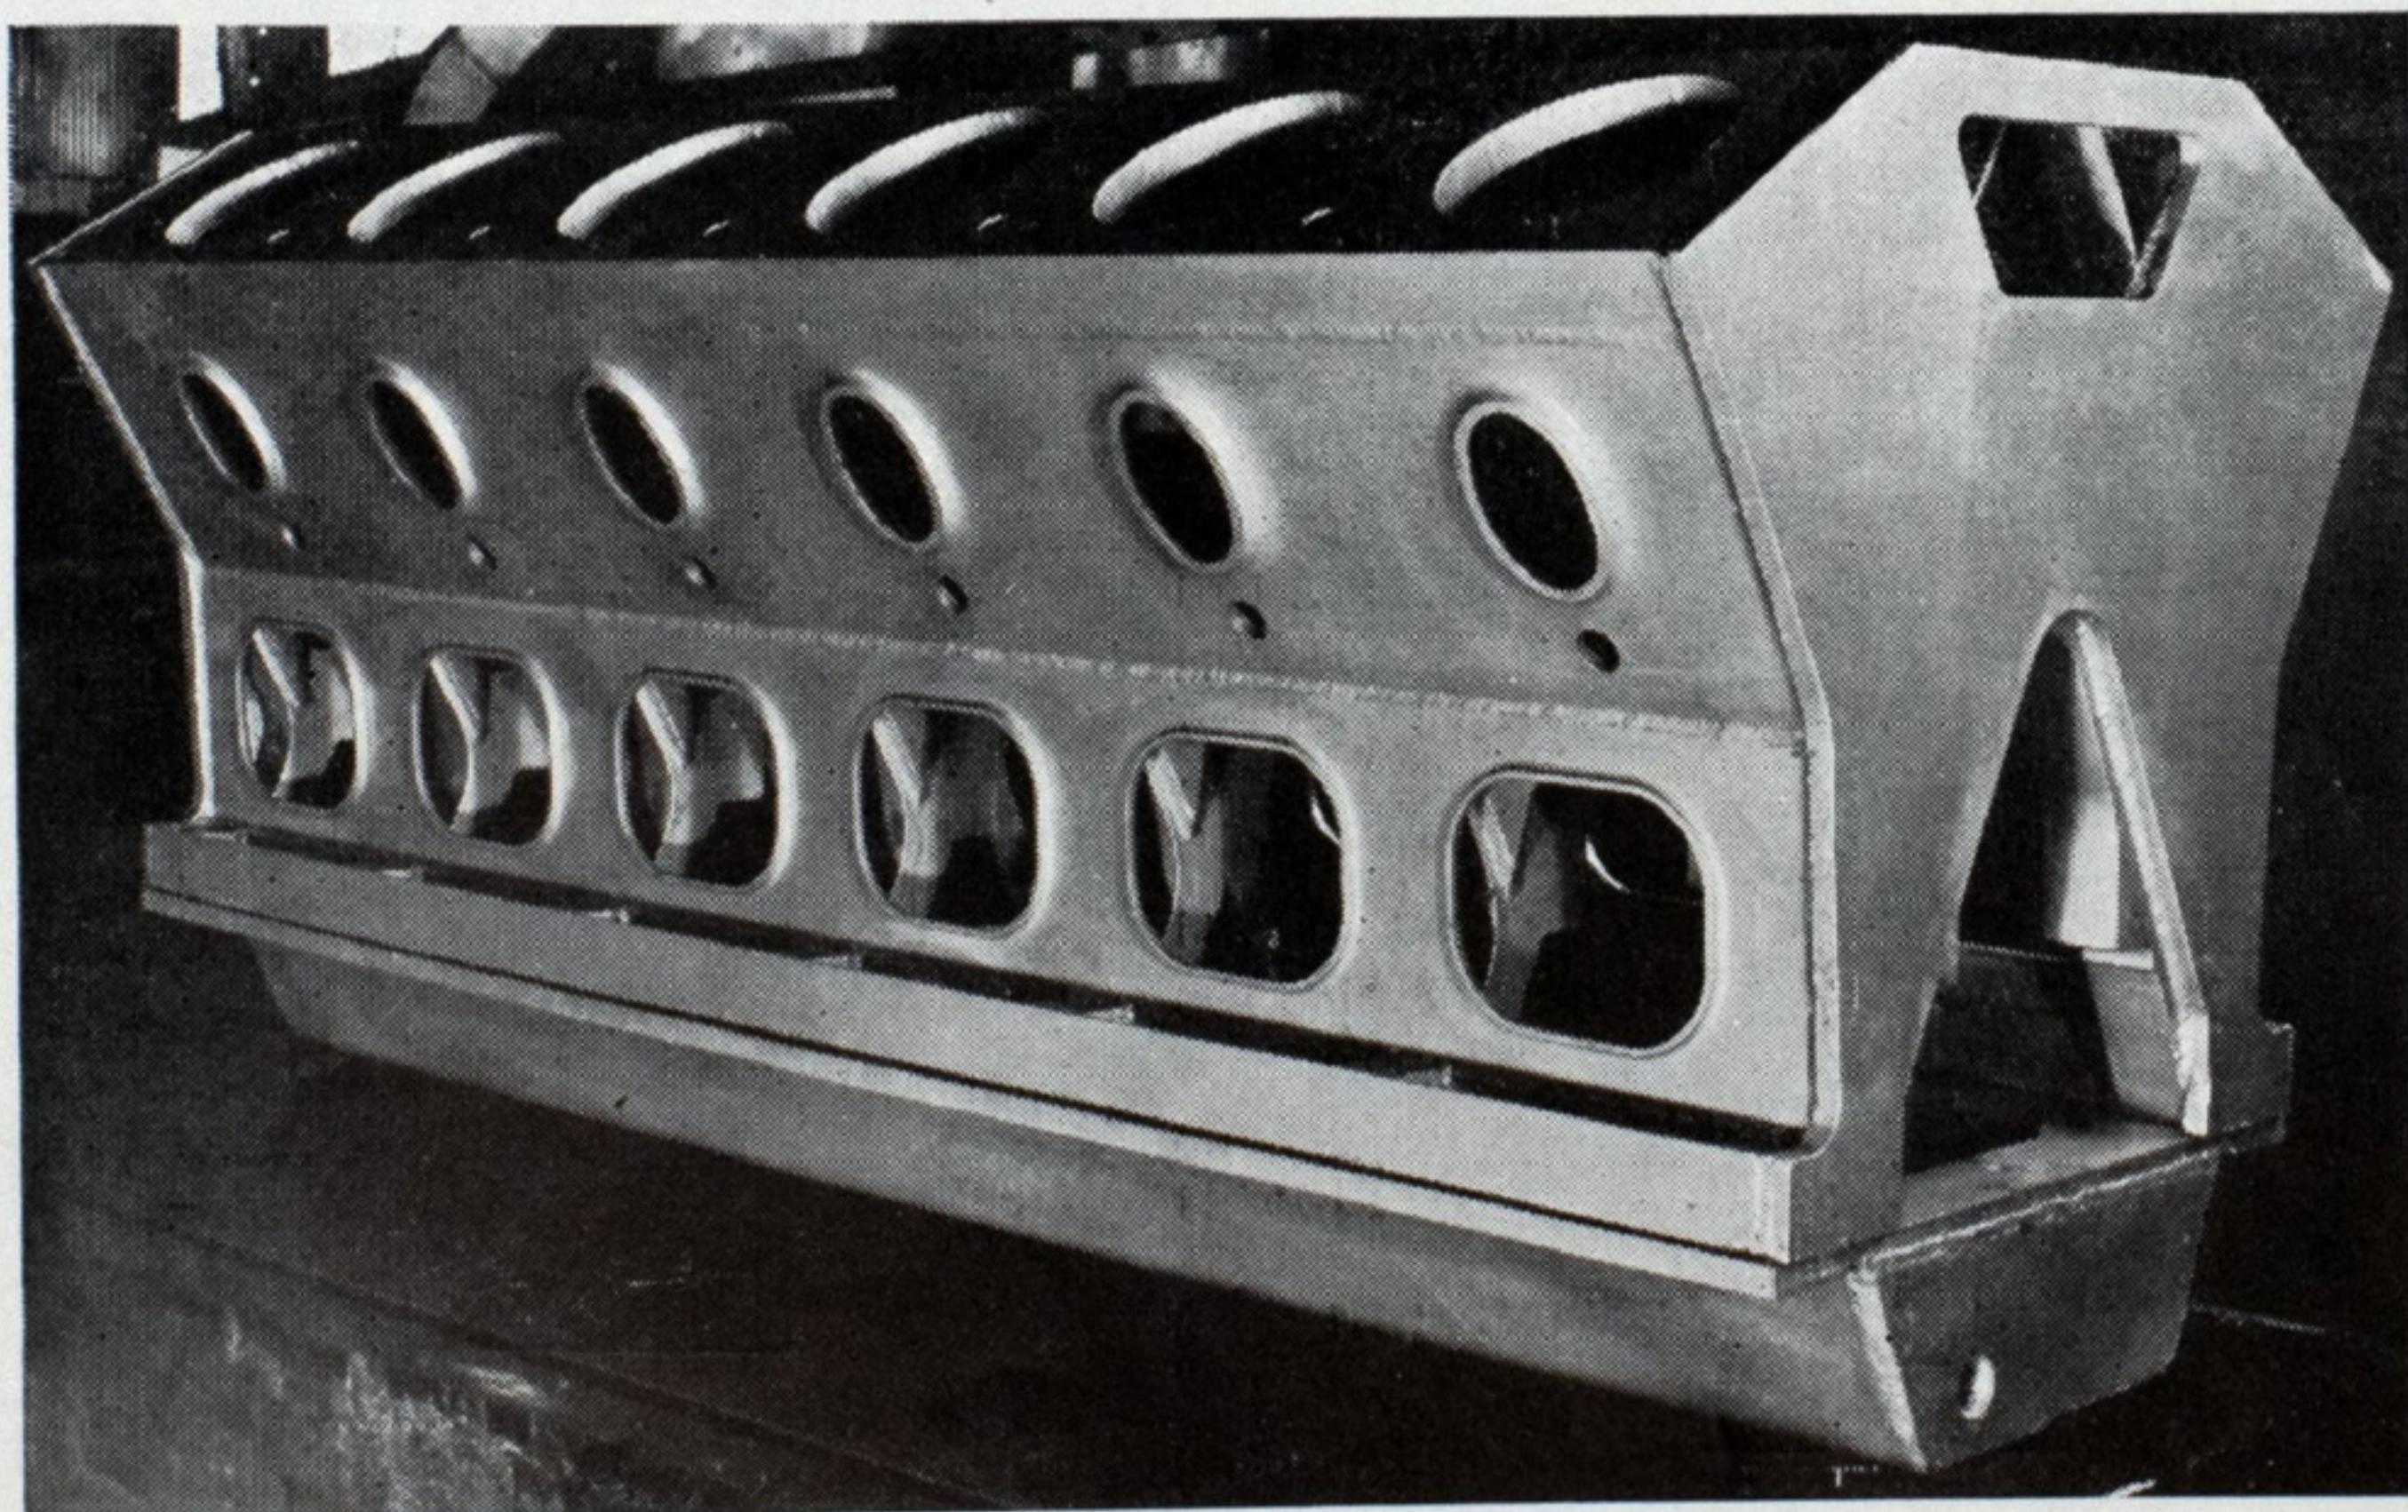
A view of the welded crankcase as it left the weld shop. It is shown resting on the oil pan to show how the latter forms the bottom tie for the complete case
